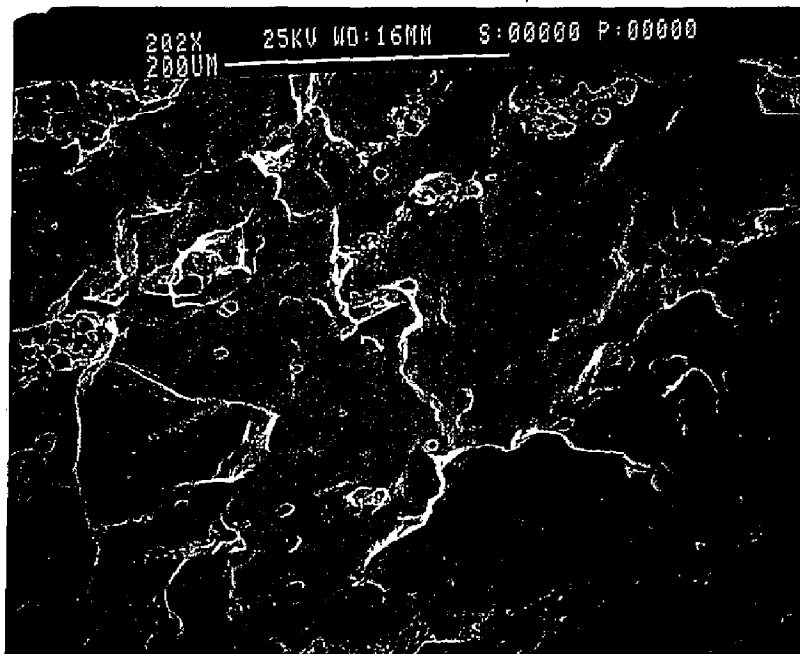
Fractograph from location #5 shows similar features as in Figure 24. The fracture initiated along the metal fold formed on the inside surface during manufacturing process; X202.
